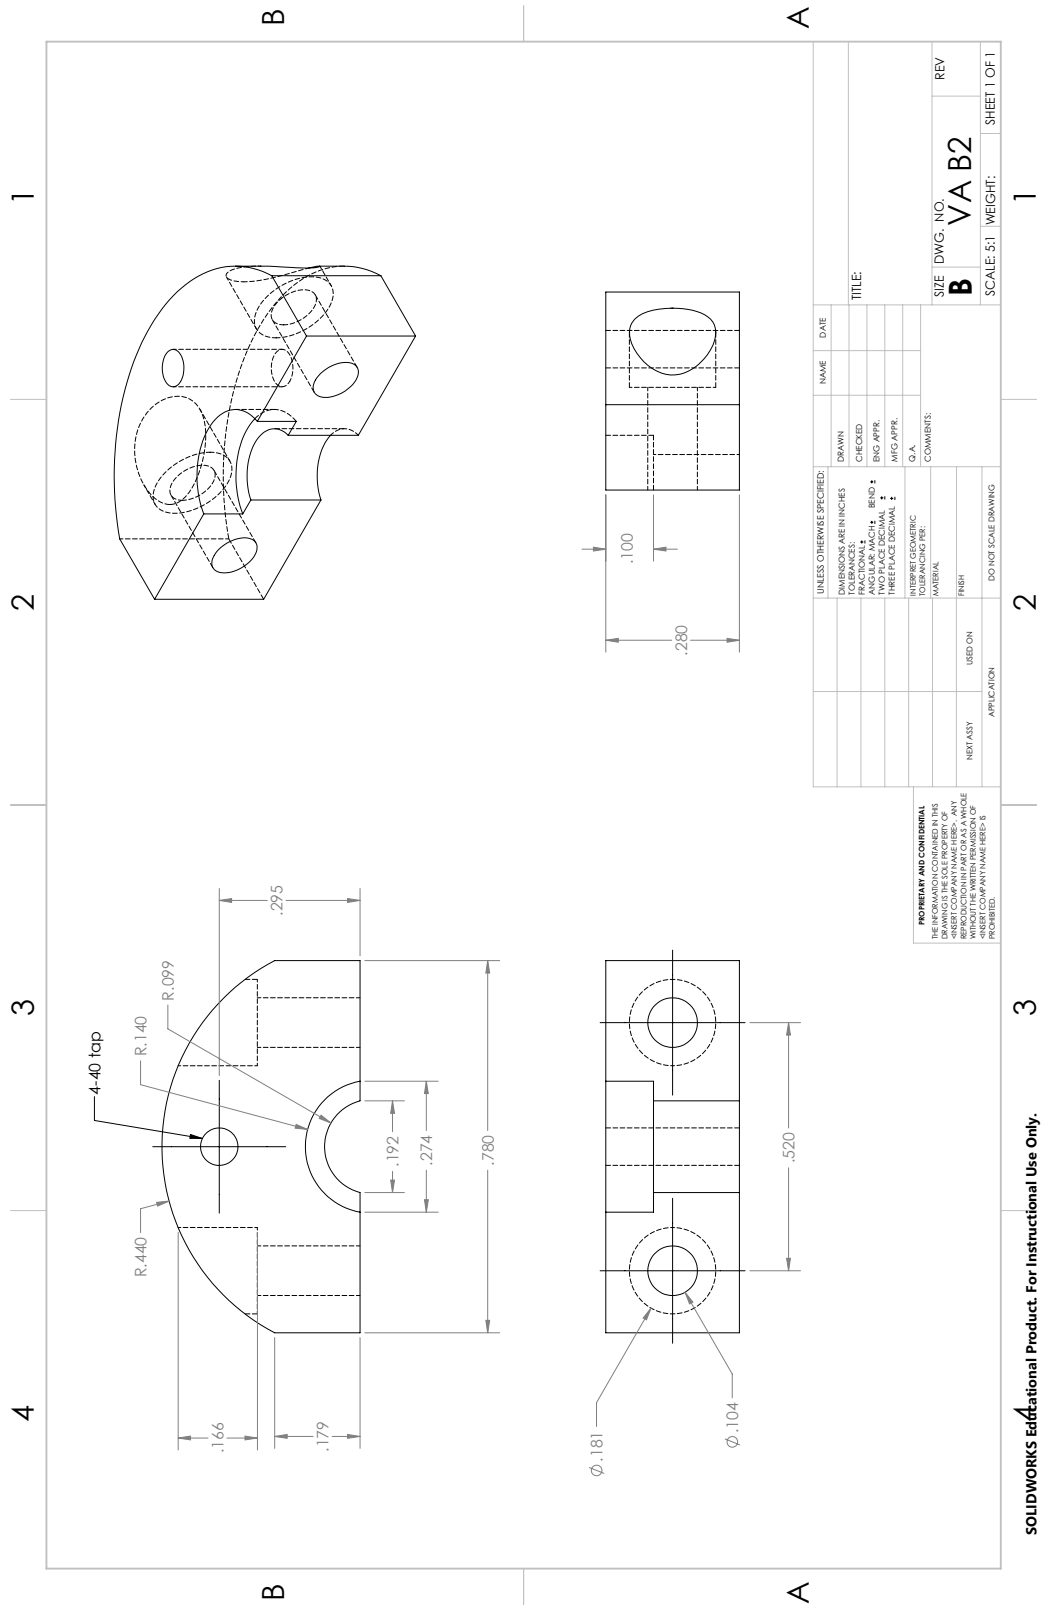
Second of two bottom components of the custom valve adapter assembly.
